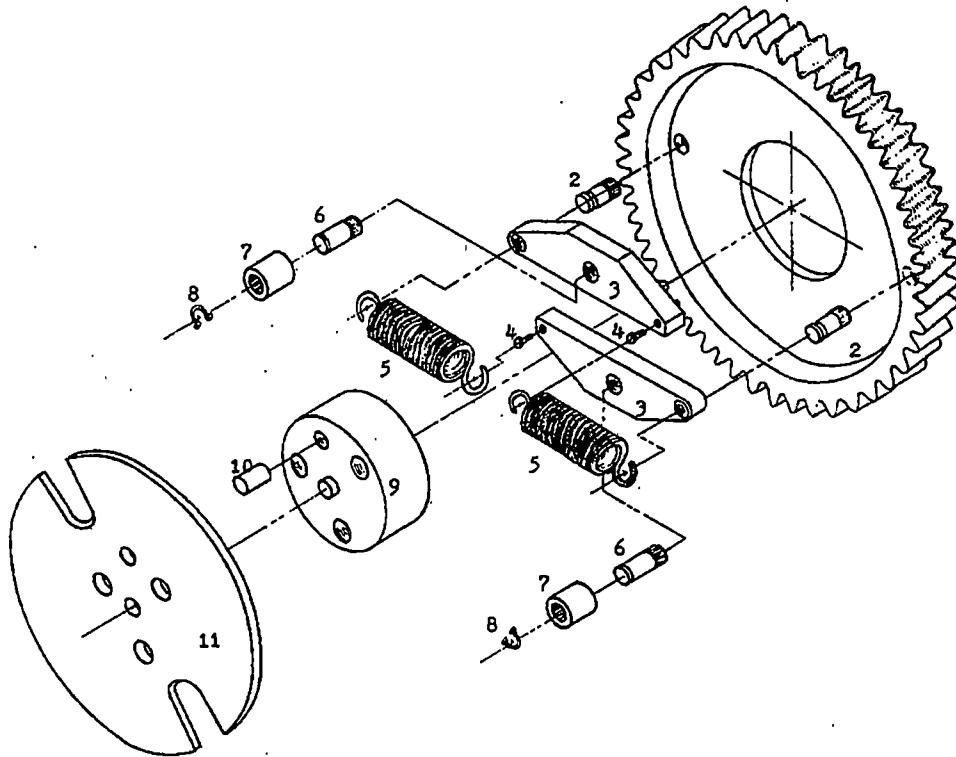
Assembly Drawing of a Variable Cam Phasing Device by David Connor
